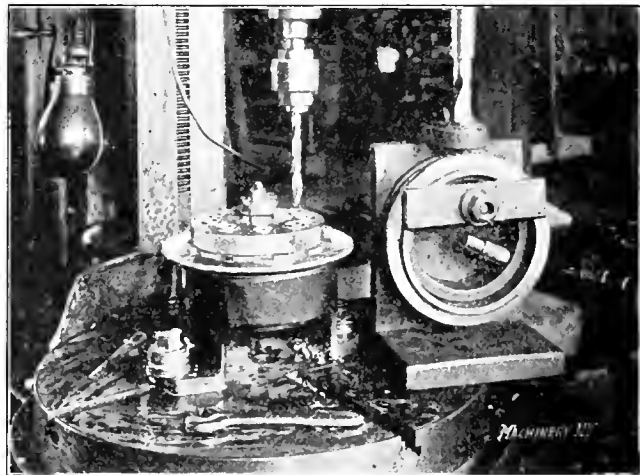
Drilling the Three Oil Supply Holes in the Case (see Fixture at the Right), and Drilling the Bolt and Pivot Holes in the Cover
